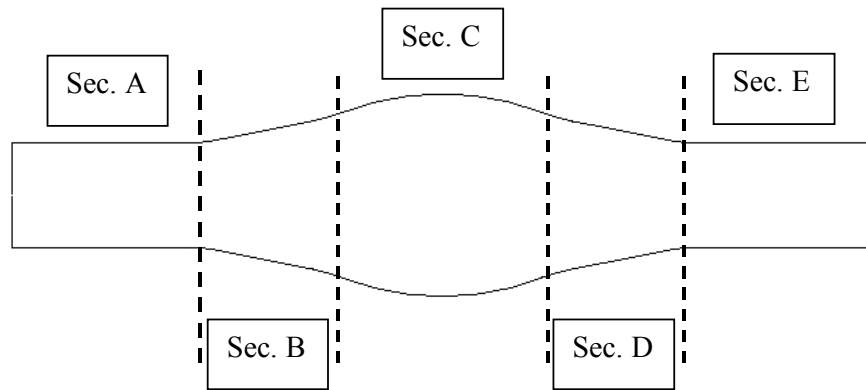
Sections on the Preform Geometry of the Fullering Stage
